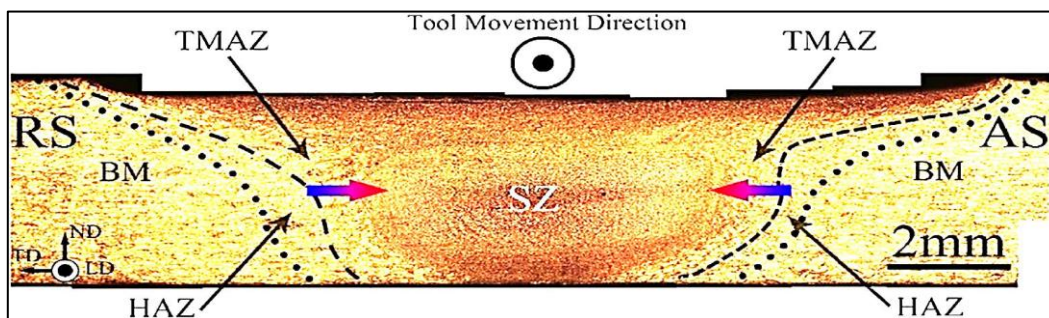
WELDING ZONES IN FSW [18]
